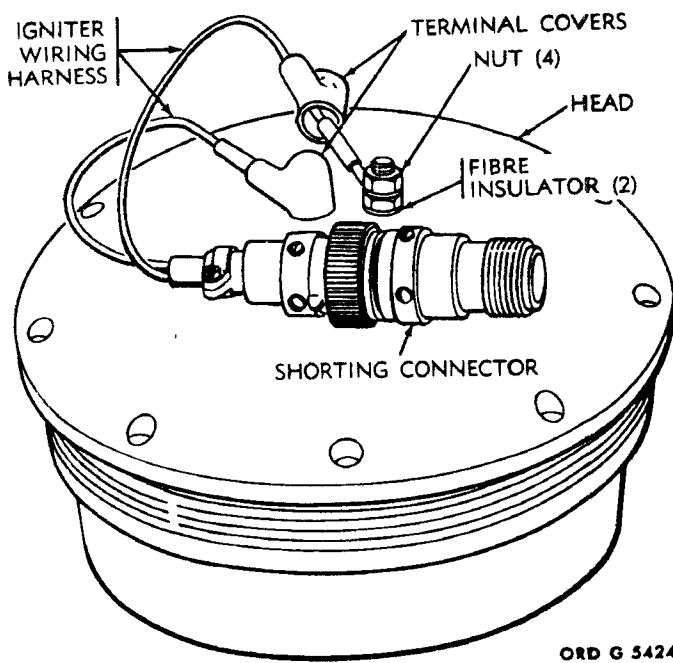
Inspection of the rocket motor igniter for corrosion.
